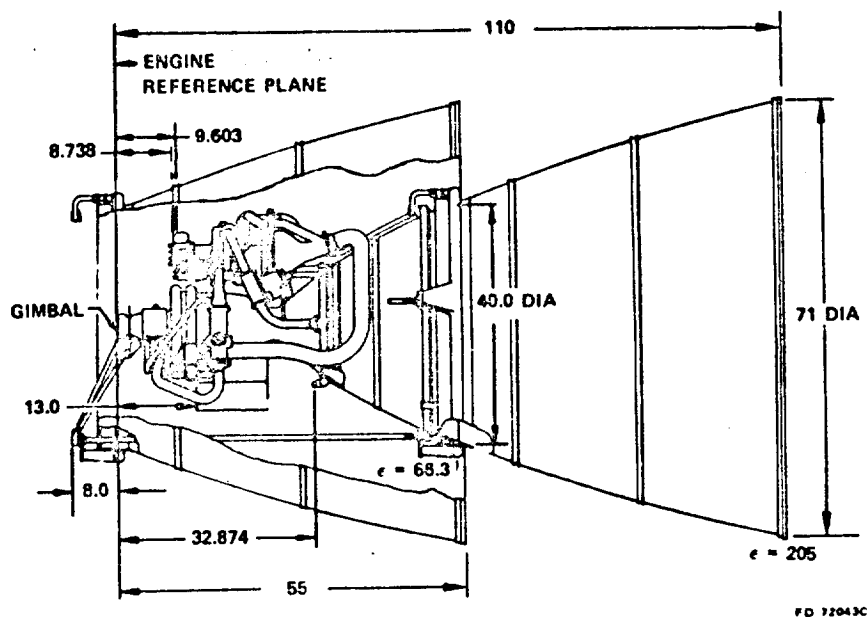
Derivative HB Engine Installation Drawing (Sheet 1)
